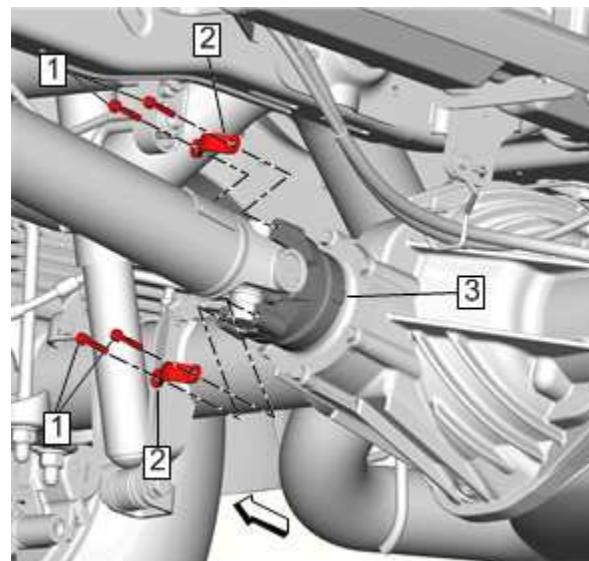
Propeller Shaft, Rear Axle Pinion Yoke, Bolts And Yoke Retainers
